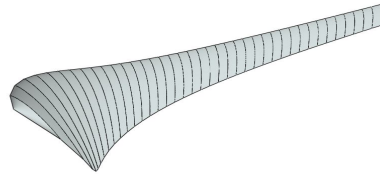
Orthographic 3D view of solid blade geometry (without filled NACA 4406 airfoils)
